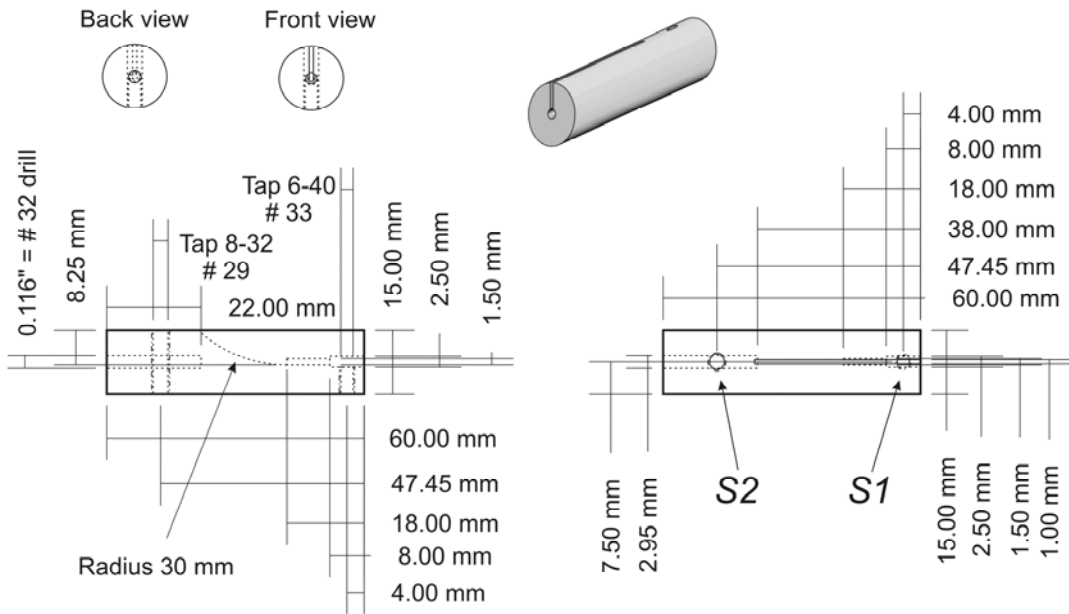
Technical drawing of the ferrule holder for the production of concave lenses. The oscillatory motor is connected at the back of the holder but is not included in the drawing. All measurements are given in mm unless otherwise stated. *S1* and *S2* denote the two set screws to hold the fibre ferrule and the motor axis respectively.
